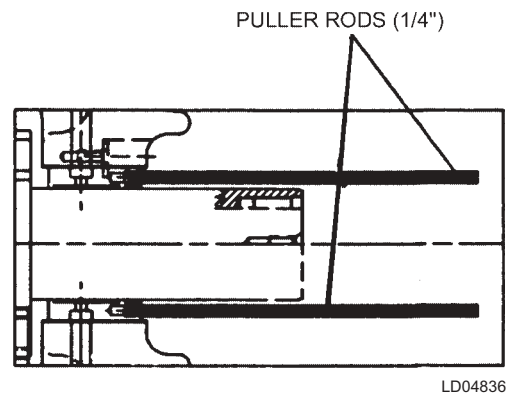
FRONT HIGH-SPEED BEARING REMOVAL
